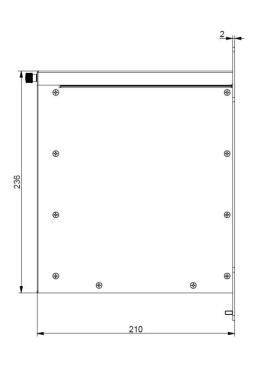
Dimensions: front side with key holes (KBox C-103-NGSF)
